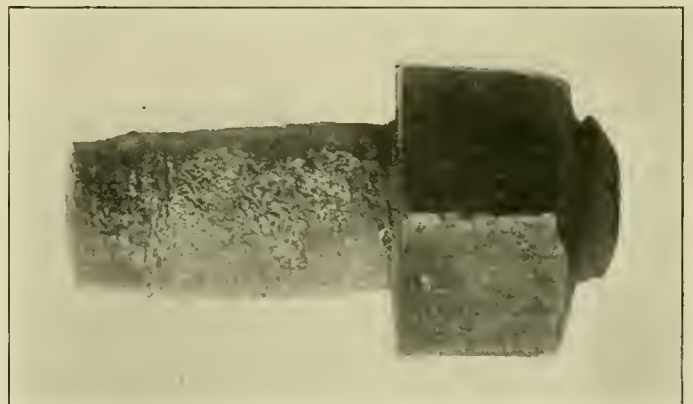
A Stud That Blew Out of a Boiler Back Head
